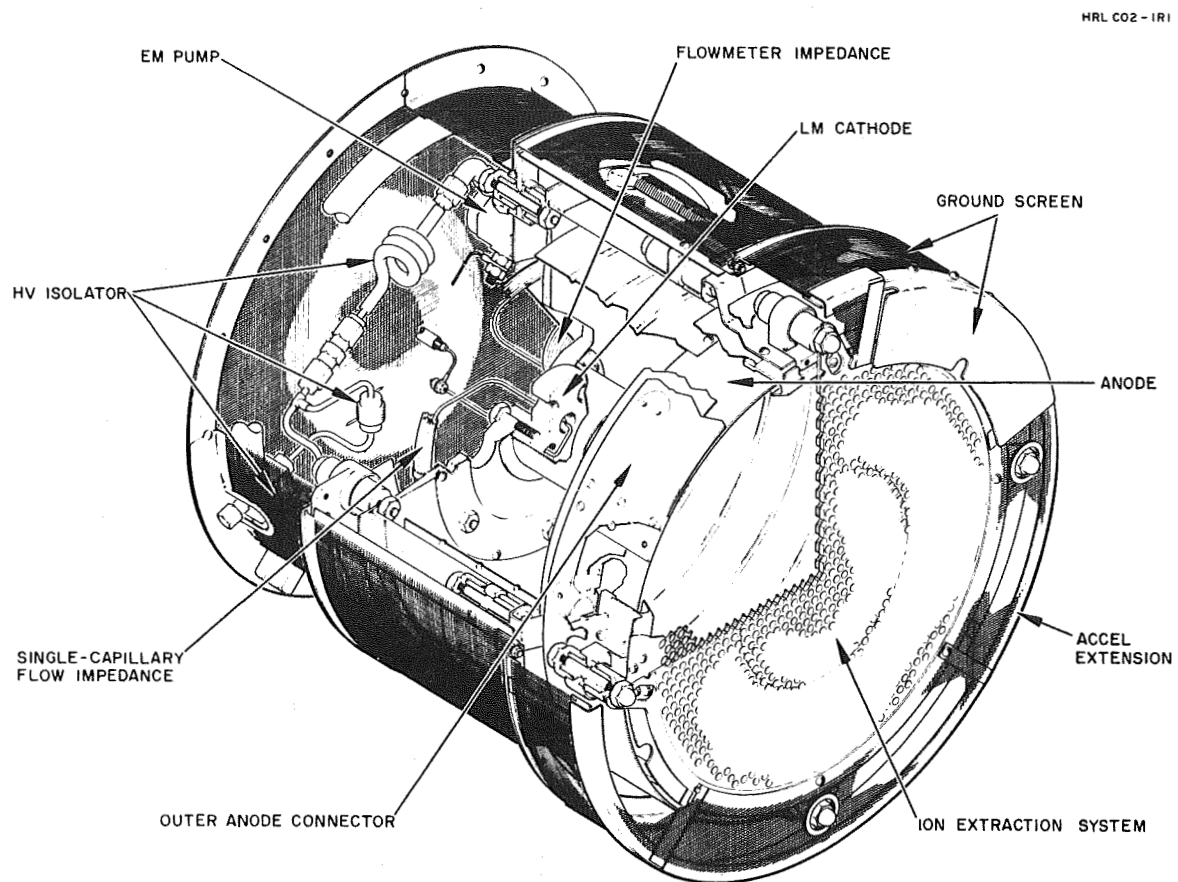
Isometric drawing of the 20 cm LM cathode thruster system (LMT-20-II).
